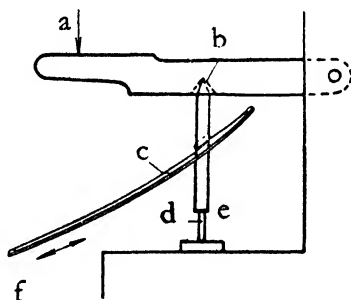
Old equipment for drilling stones. (*a*) Pressure with left arm, (*b*) thrust bearing, (*c*) bow, (*d*) drill, (*e*) support of stone to be drilled, (*f*) right hand of operator moving the bow.
